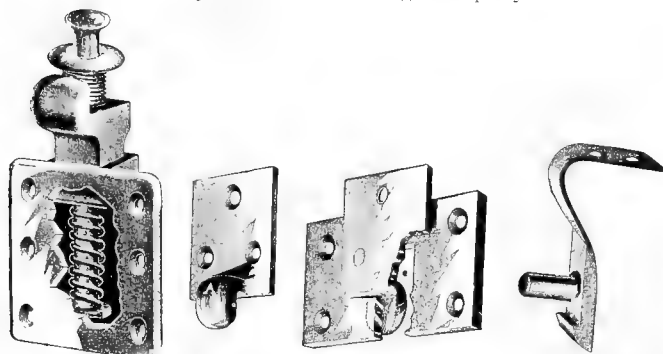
Sofa Arm Rest Fixtures. Dayton Manufacturing Company.
